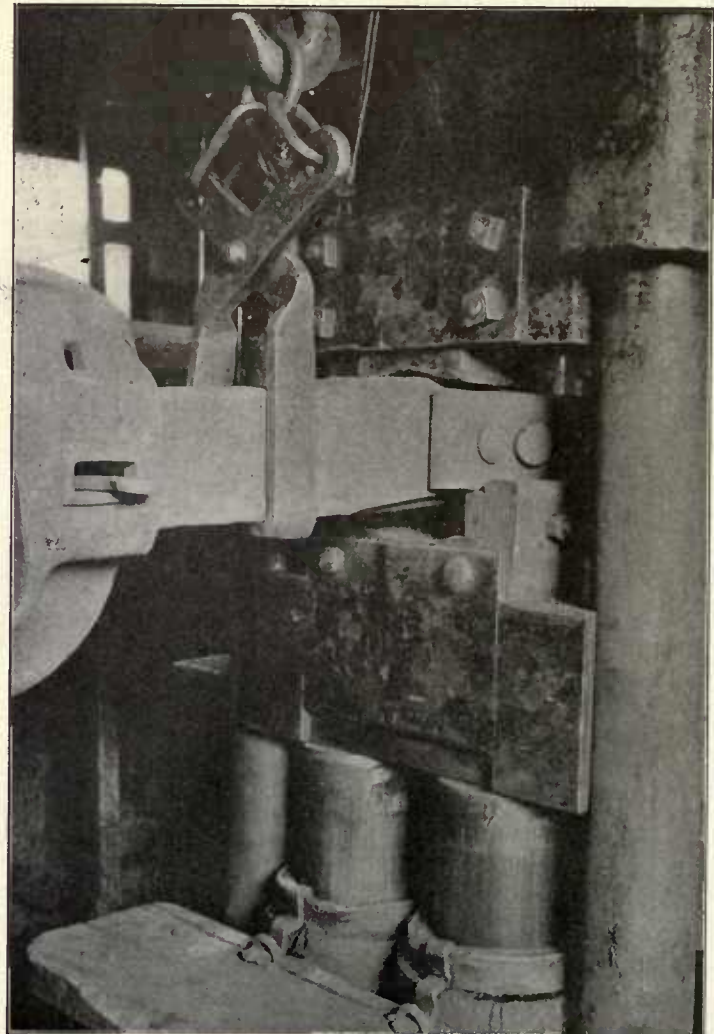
Coupler Yoke Rivets About to be Sheared.
